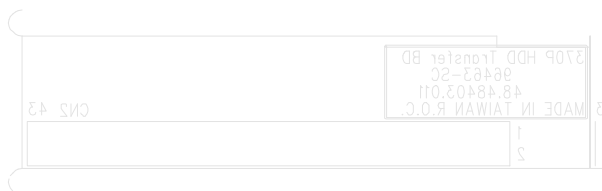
HDD Connection Board Layout (Bottom Side)
